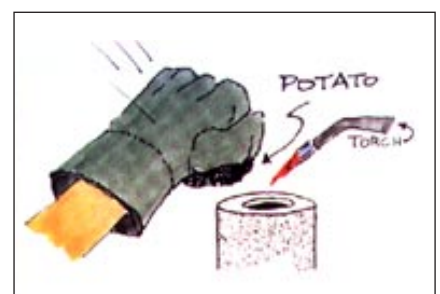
After melting the metal, half a potato is immediately pressed on the flask, so as to seal its upper part. The steam produced pushes the molten metal into the mould cavity.
